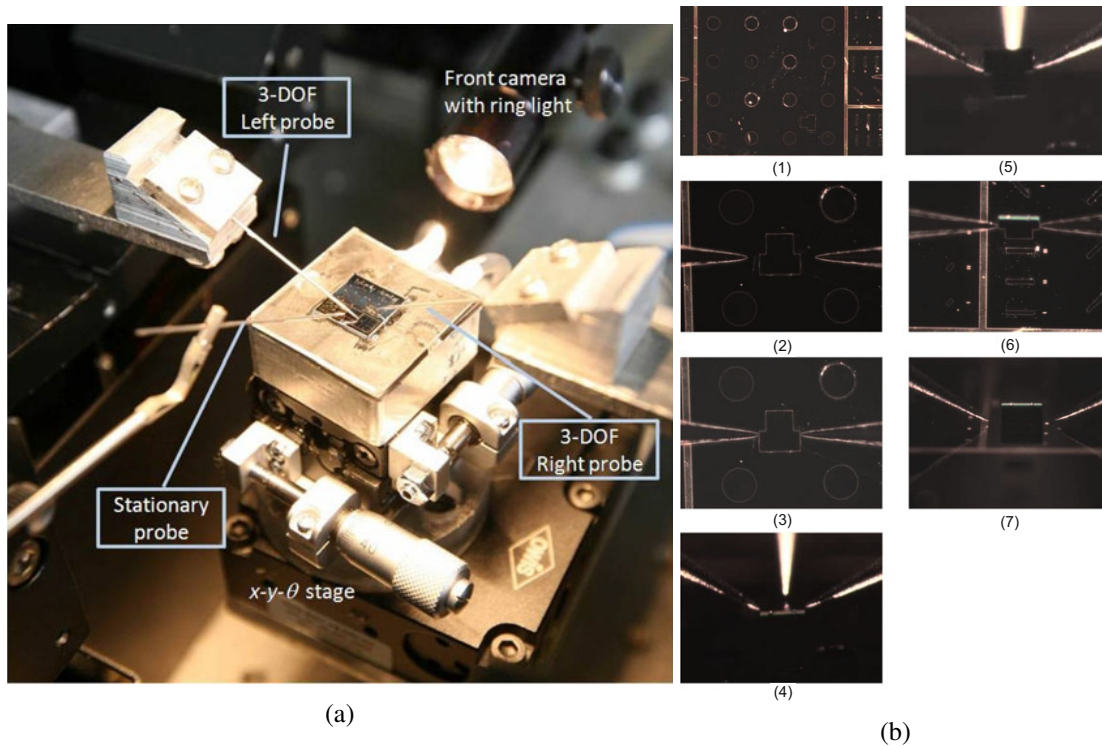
(a) Closeup view of the robotic microassembly station, (b) (1) Initial part position, (2) Part rotated and probes moved close to part, (3) Probes gripping part after automated sequence, (4) Part at start of out of plane rotation, (5) Part after out of plane rotation, (6) Part and slot prealigned, (7) Part inserted [178].
